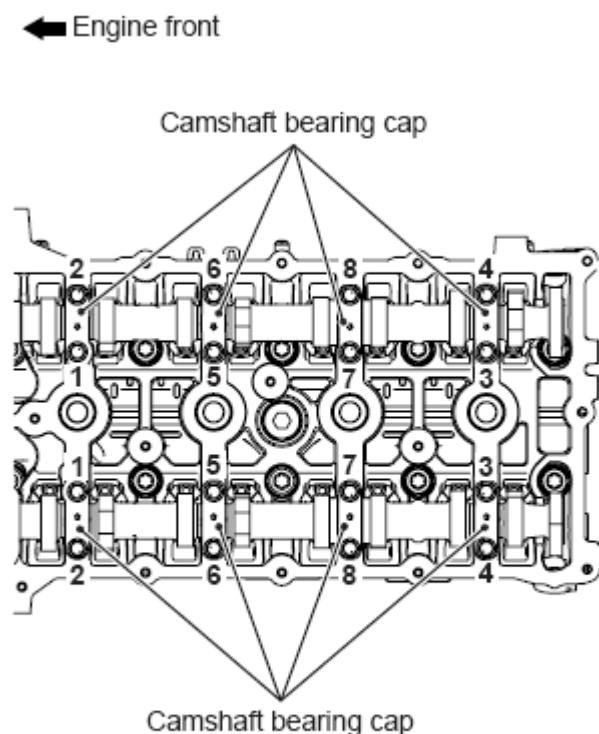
Identifying Loosening Sequence Of Camshaft Bearing Front Cap Mounting Bolts
